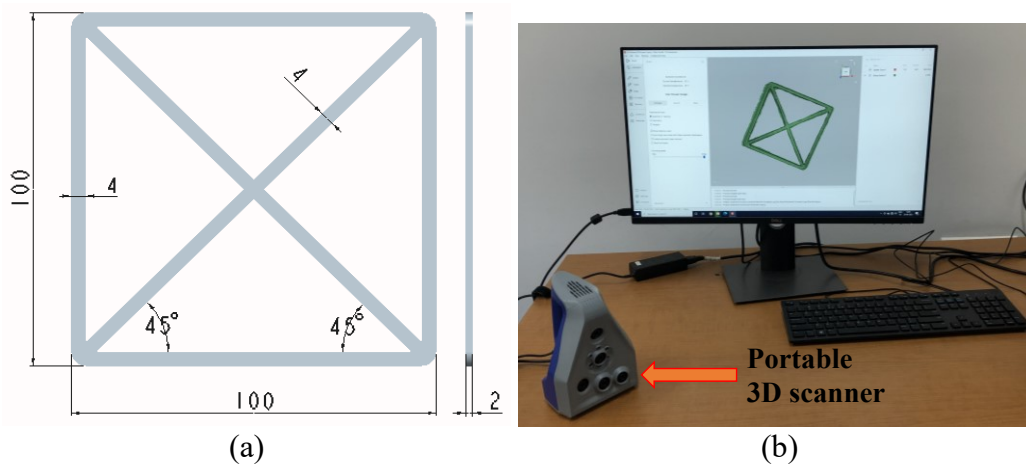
(a) CAD model of warpage sample (All dimensions are in mm) and (b) Hand-held 3D scanner (Artec 3D Space Spider, USA).
